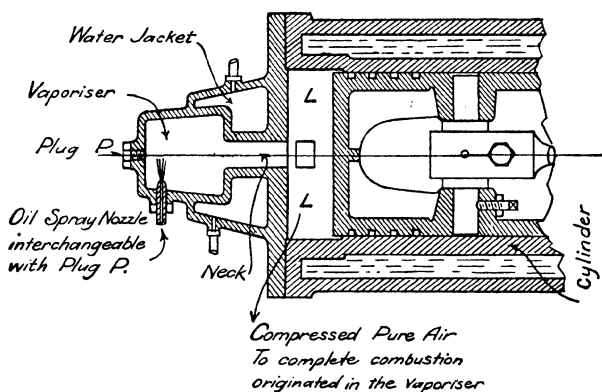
Akroyd Water-jacketed Vaporizer (Sectional Plan)
